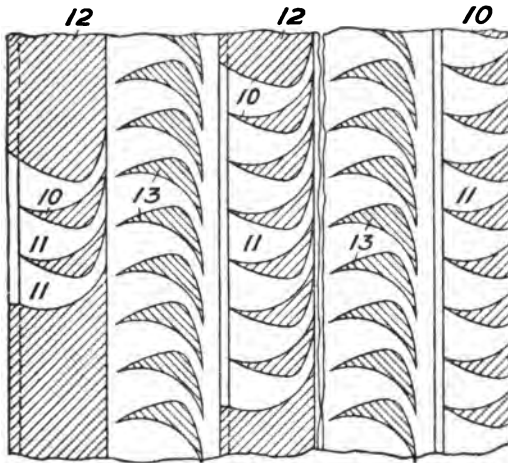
Fixed and Moving Blades of Parsons Turbine.
